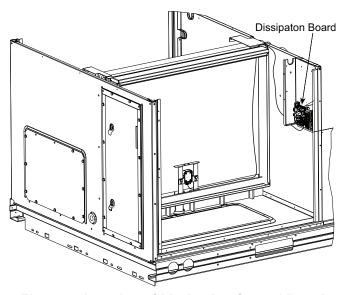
Location of Dissipation Control Board (Shown with Dust Cover Removed)
